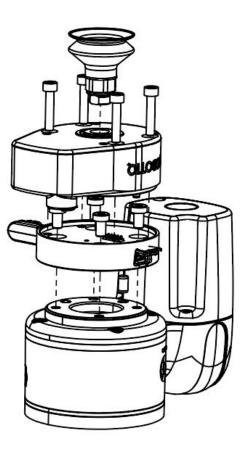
Mechanical installation of the I/O Coupling and the Vacuum Gripper
